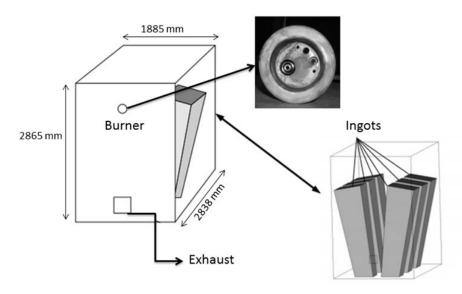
Soaking pit furnace configuration and arrangement of ingots inside the furnace (18)
